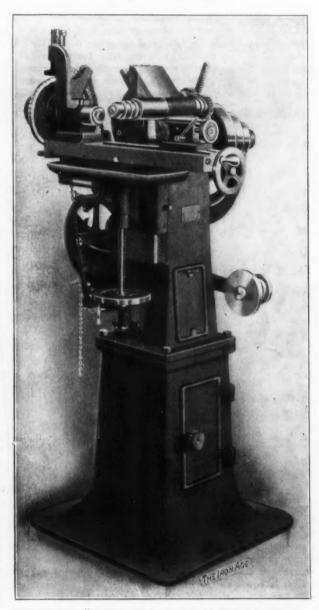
The Dwight Slate Machine Company's Spur and Bevel Gear Cutter.
